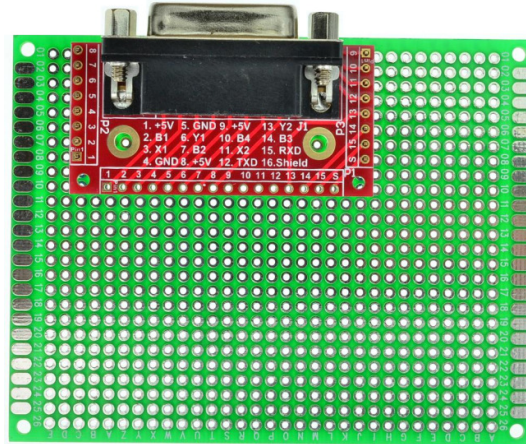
Solid mounting the D25-BO-V1A on a prototype breadboard
